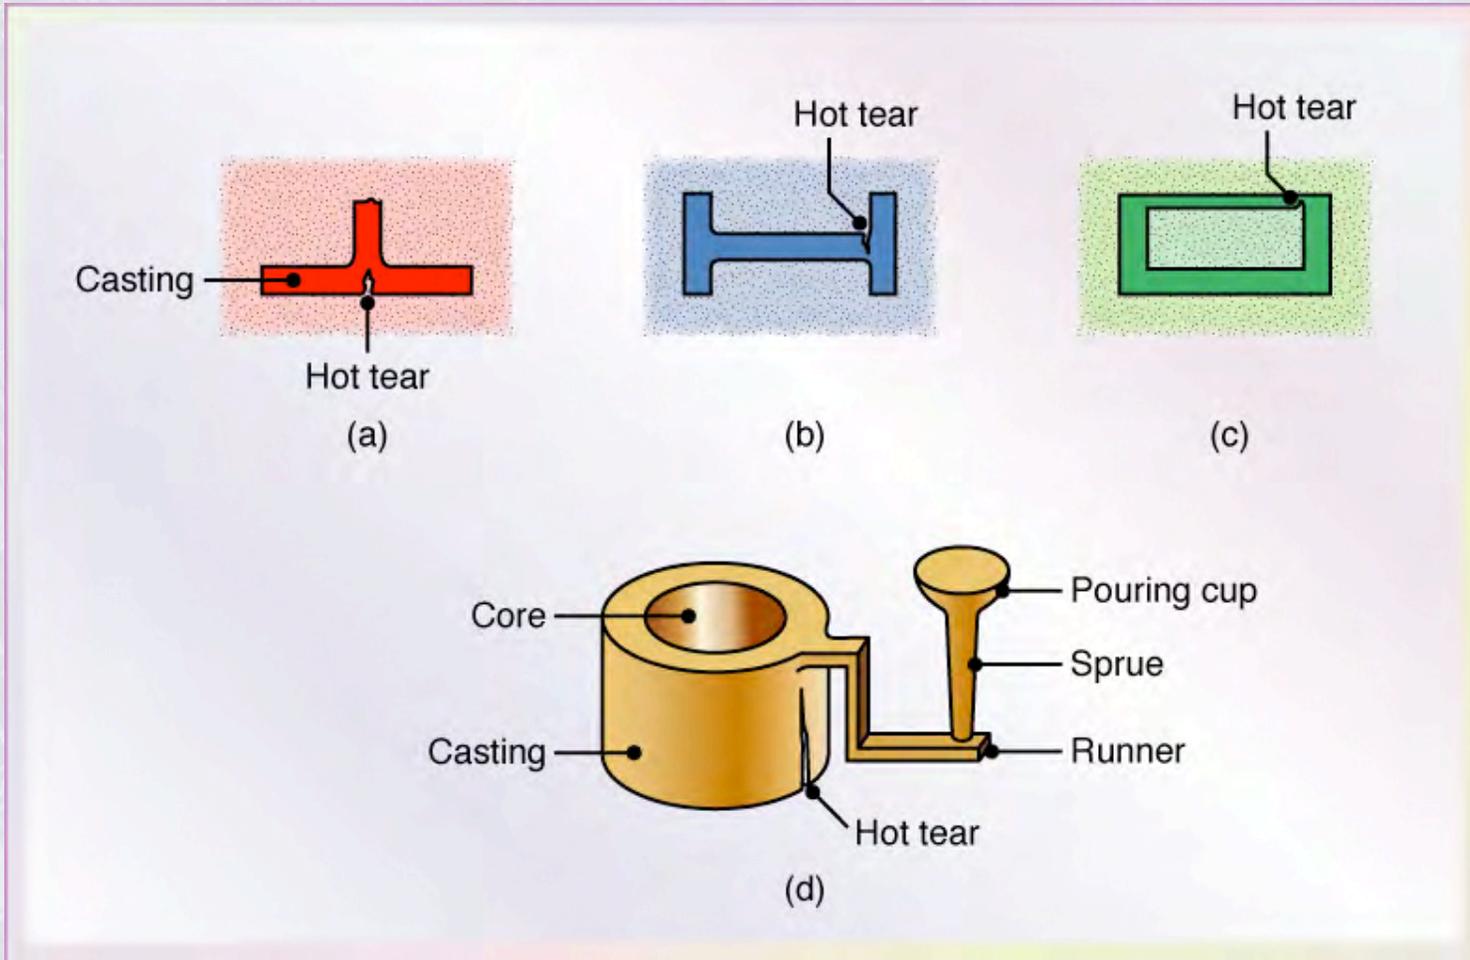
Examples of hot tears in castings. These defects occur because the casting cannot shrink freely during cooling, owing to constraints in various portions of the molds and cores. Exothermic (heat-producing) compounds may be used (as exothermic padding) to control cooling at critical sections to avoid hot tearing
